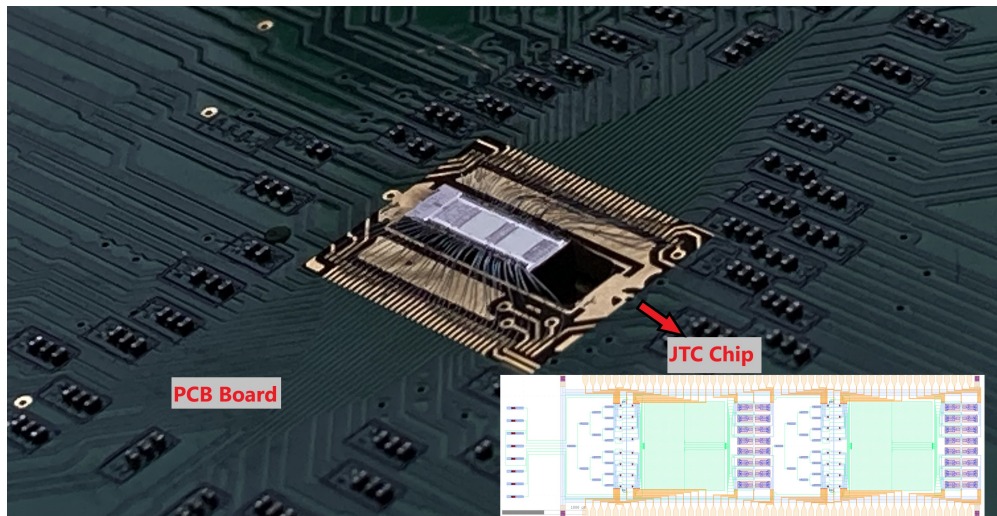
PCB photo and layout diagram of the JTC prototype.
